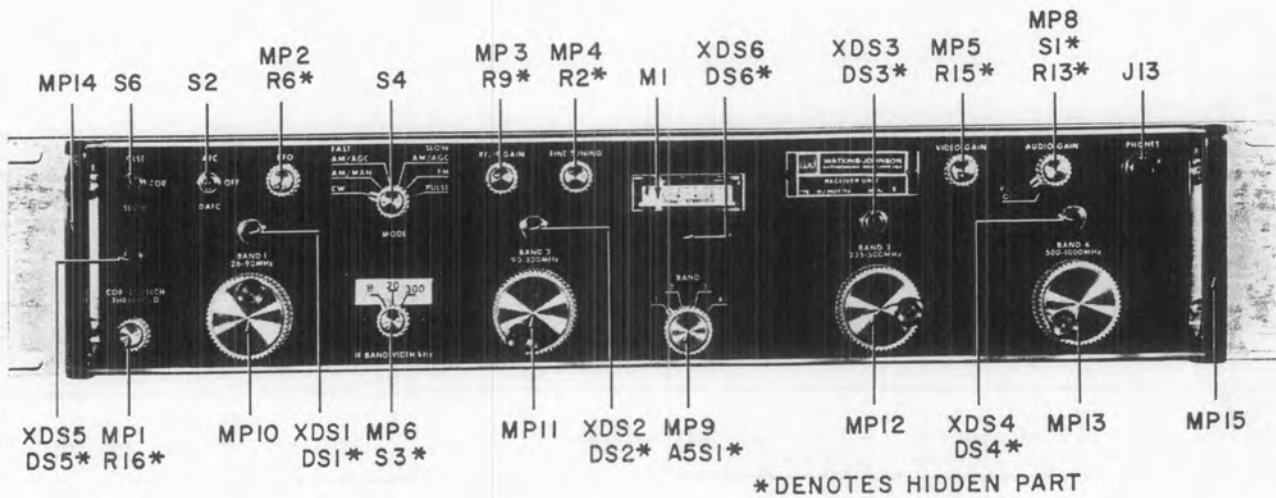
Type WJ-9026/RU Receiver Unit, Front View, Location of Components
